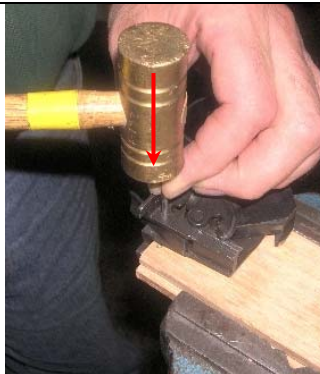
Align Trigger Housing Over Hole in Wood Block and Drive Pivot Pin Out Using Small End of Taper Pin
